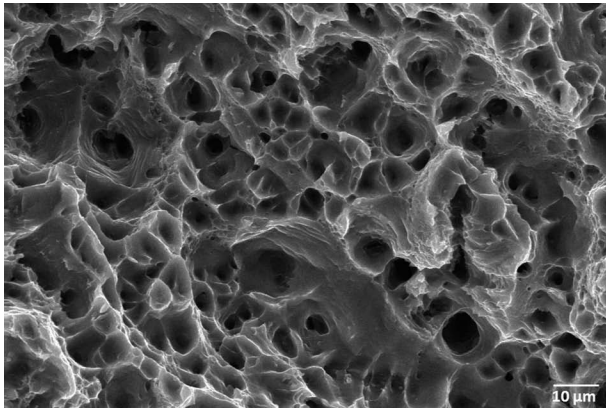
High magnified image of the fracture surface shown in Fig. 176
